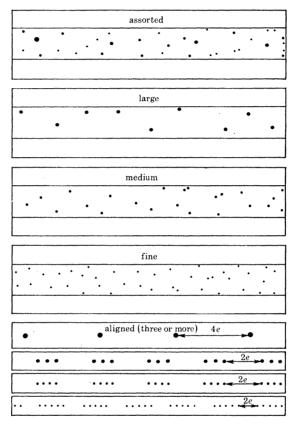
Typical porosity chart for welds in plate over 6.4 mm up to 12.7 mm thick.
